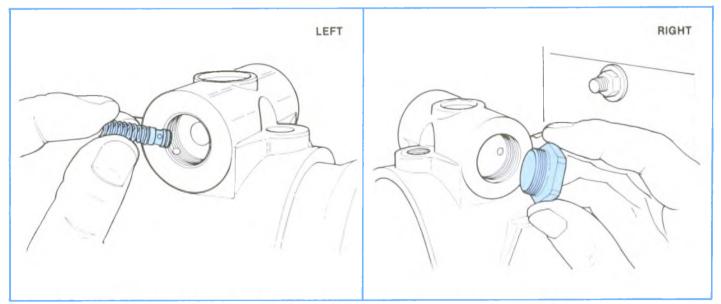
, Removing Spring and Valve (Left) and Power Side Plug (Right).
